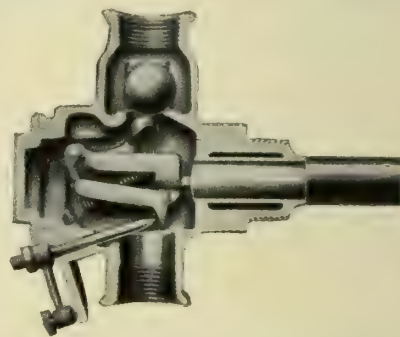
HOFFMAN THERMOSTATIC GAS VALVE Showing details and operation
